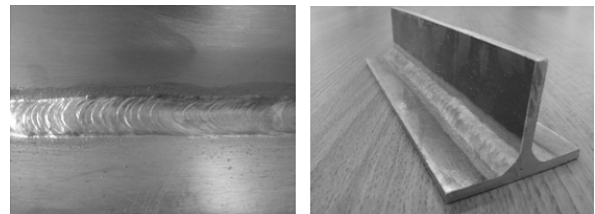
Picture of aluminum sample by pulse welding
